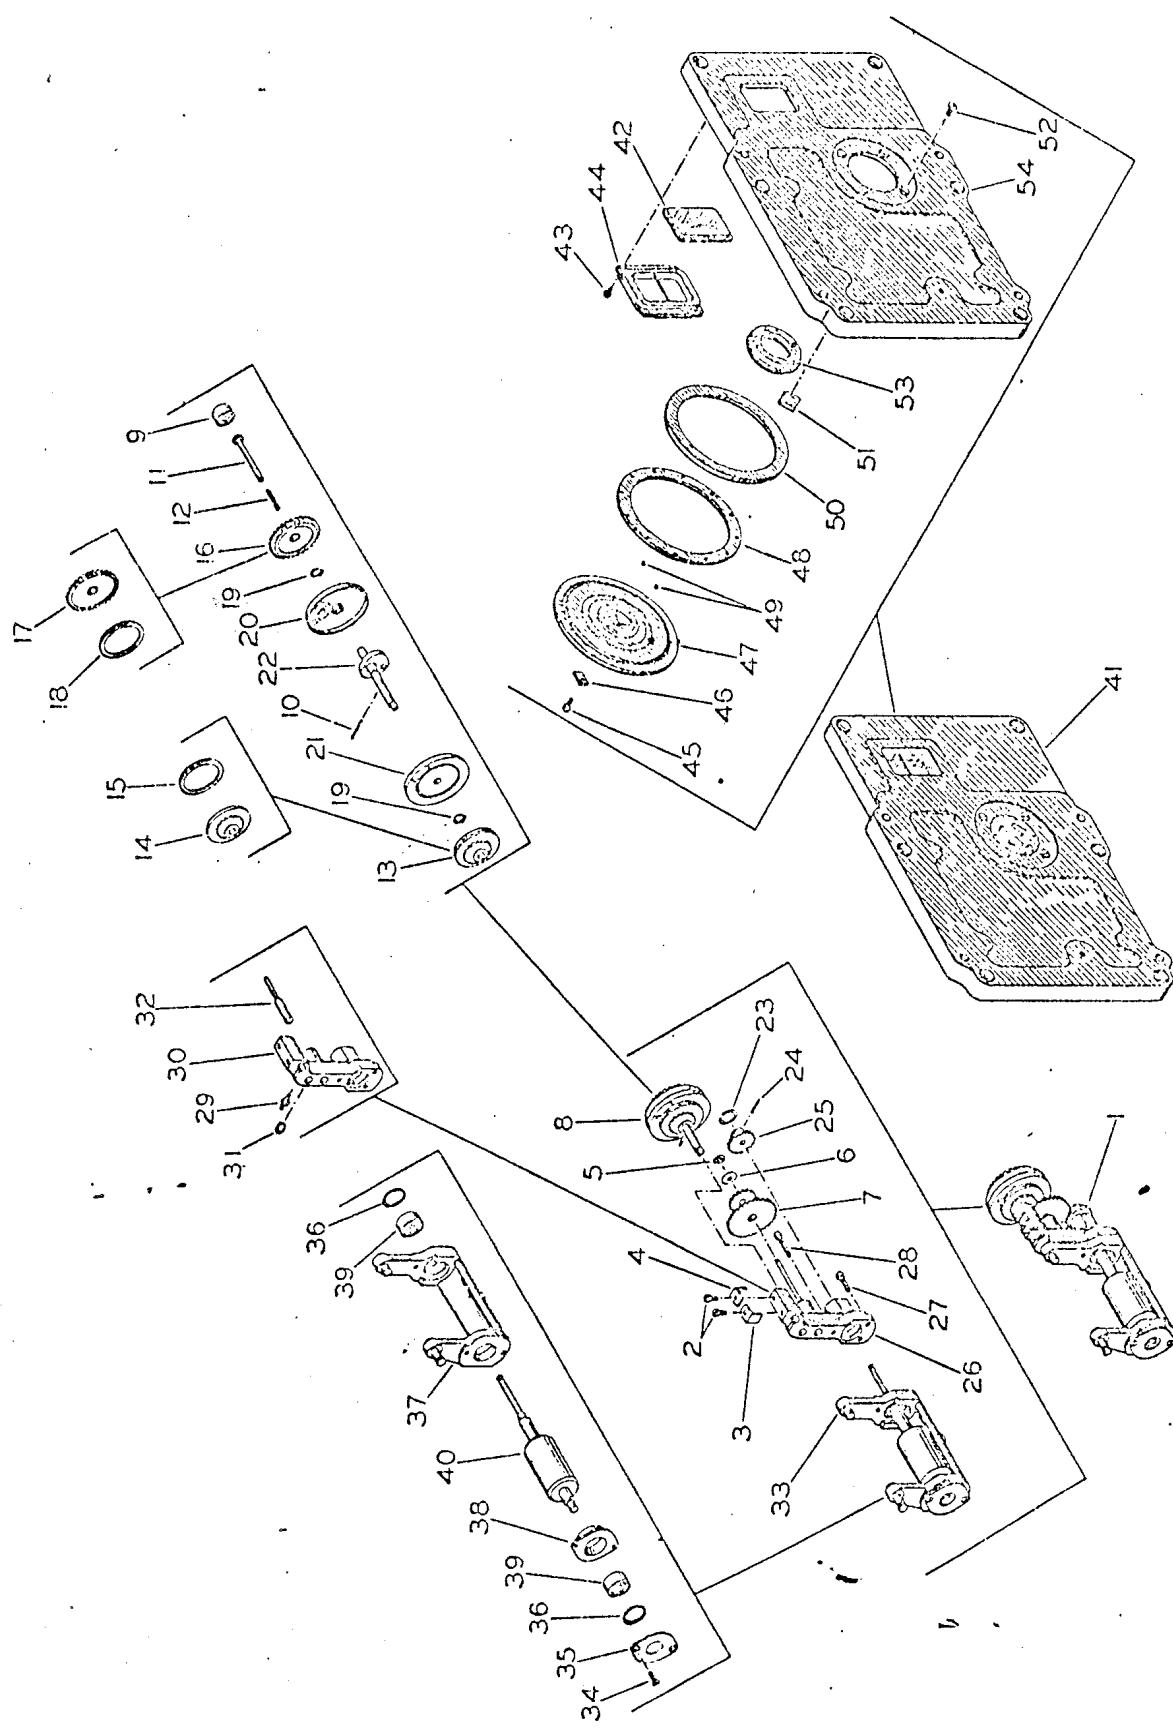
Average Yoke and Index Assembly and Mounting Plate Assembly
